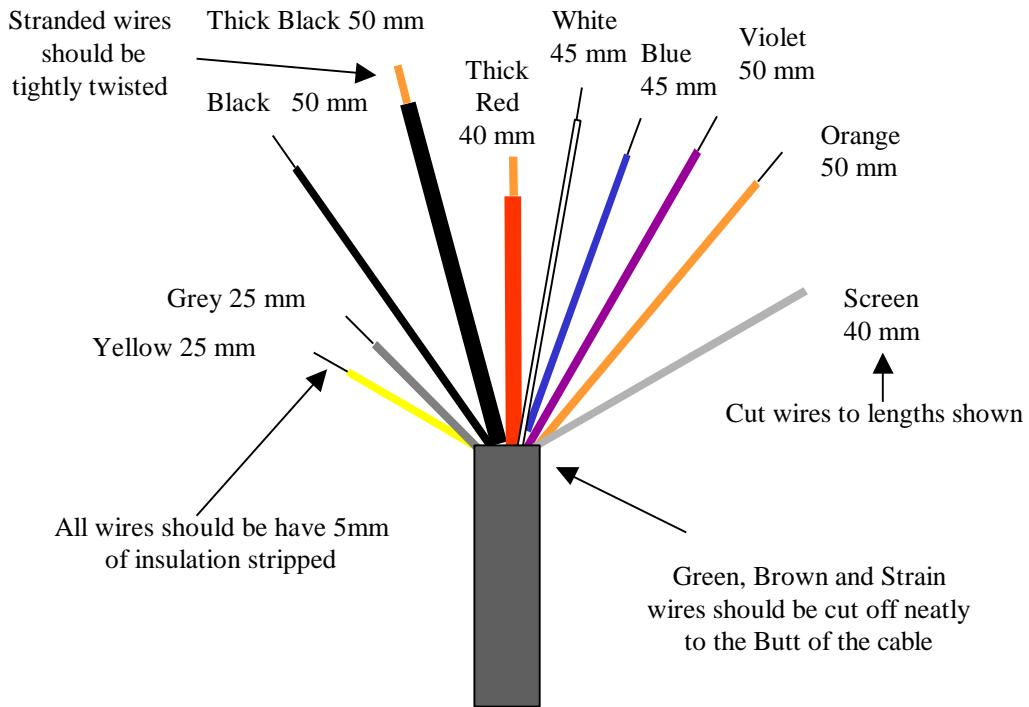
Wire Striping Dimensions for 80 Metre Drop Cable Lead-Out
